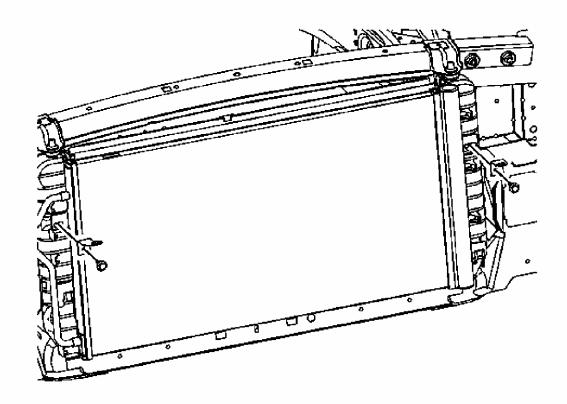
View Of Condenser & Bolts Courtesy of GENERAL MOTORS CORP.
